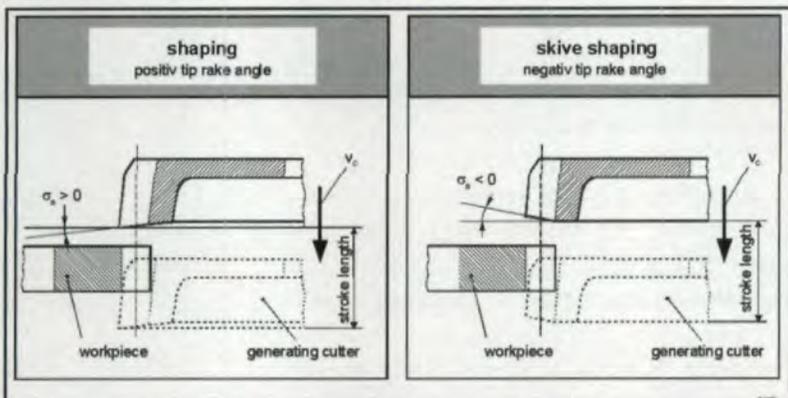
Negative rake angle on a cutting gear for skive shaping.
